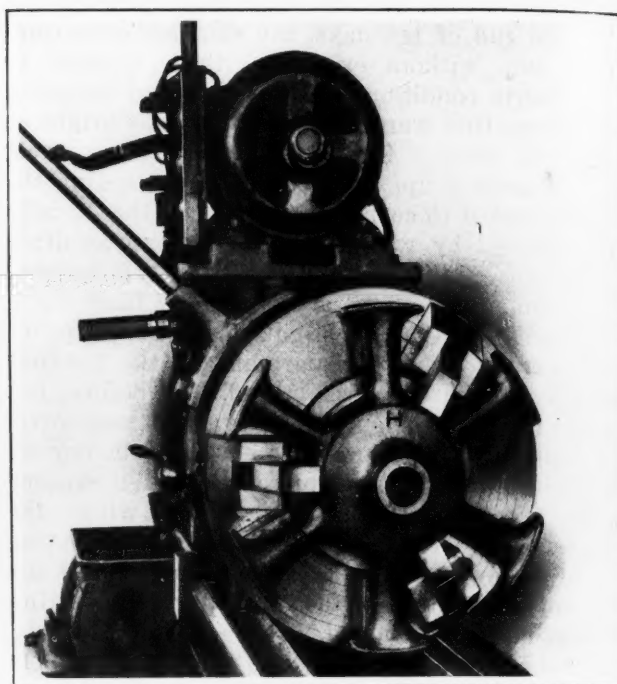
Wheel Hub Held in Chuck Shown in Fig. 3
